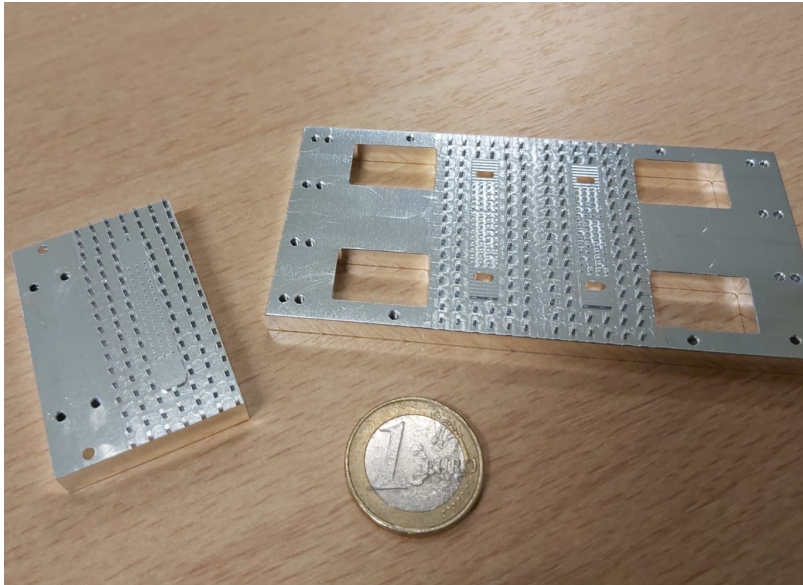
The fabricated top and bottom pieces of the final design.
